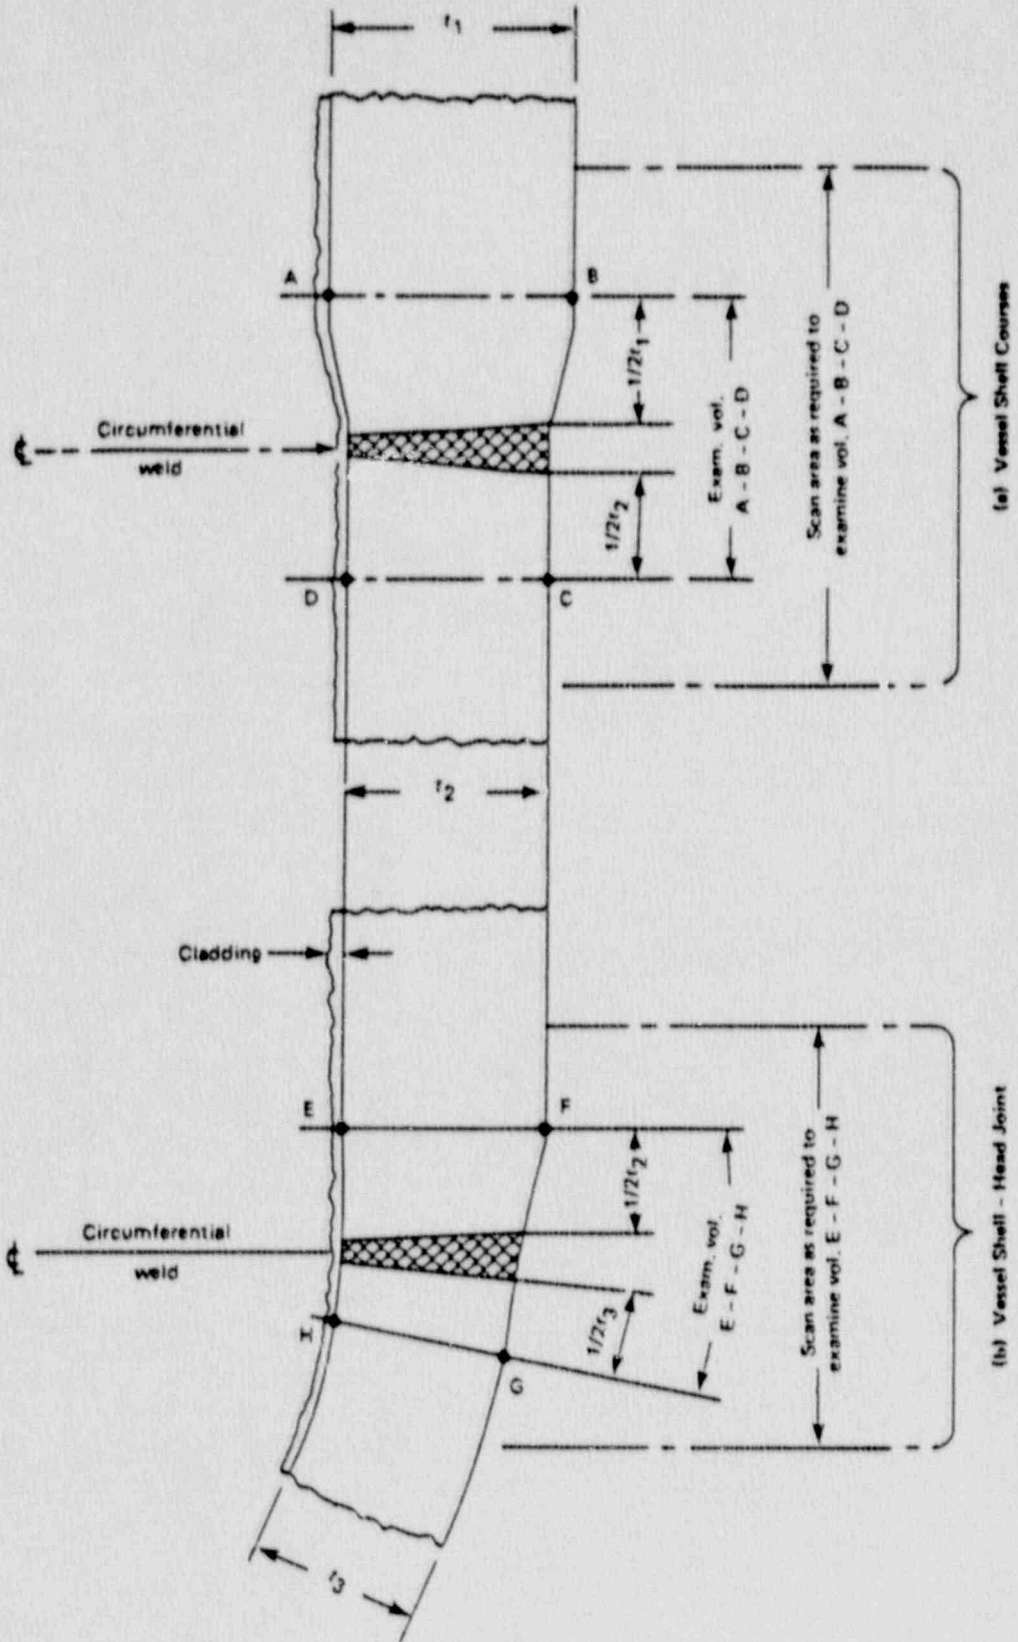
FIG. IWB-2500-1 VESSEL SHELL CIRCUMFERENTIAL WELD JOINTS
